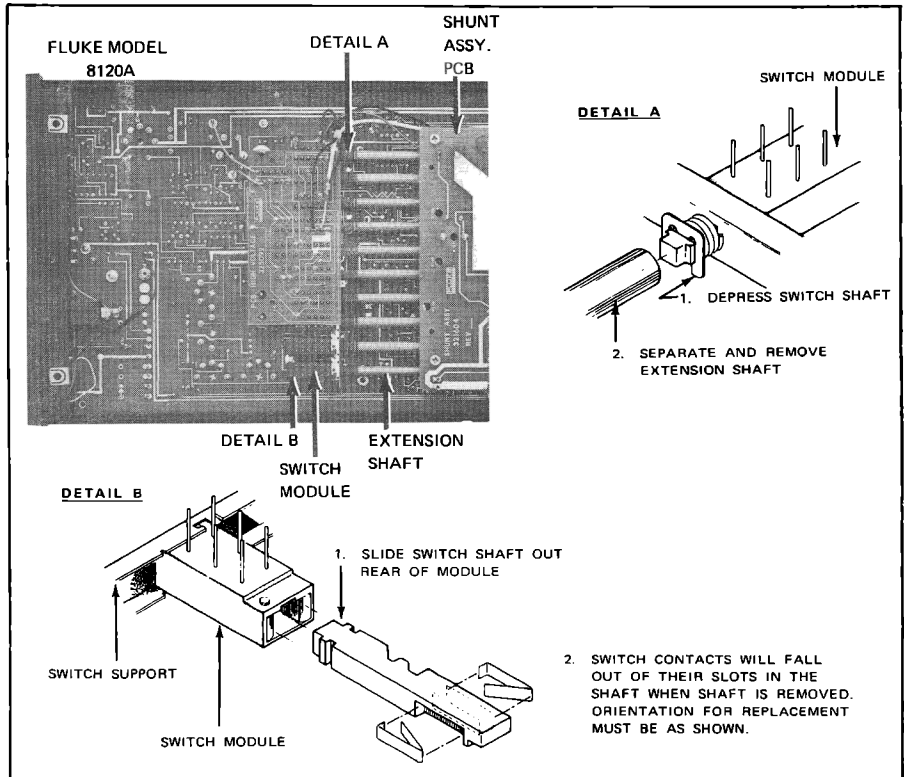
DISASSEMBLY OF REAR SWITCH MODULES
